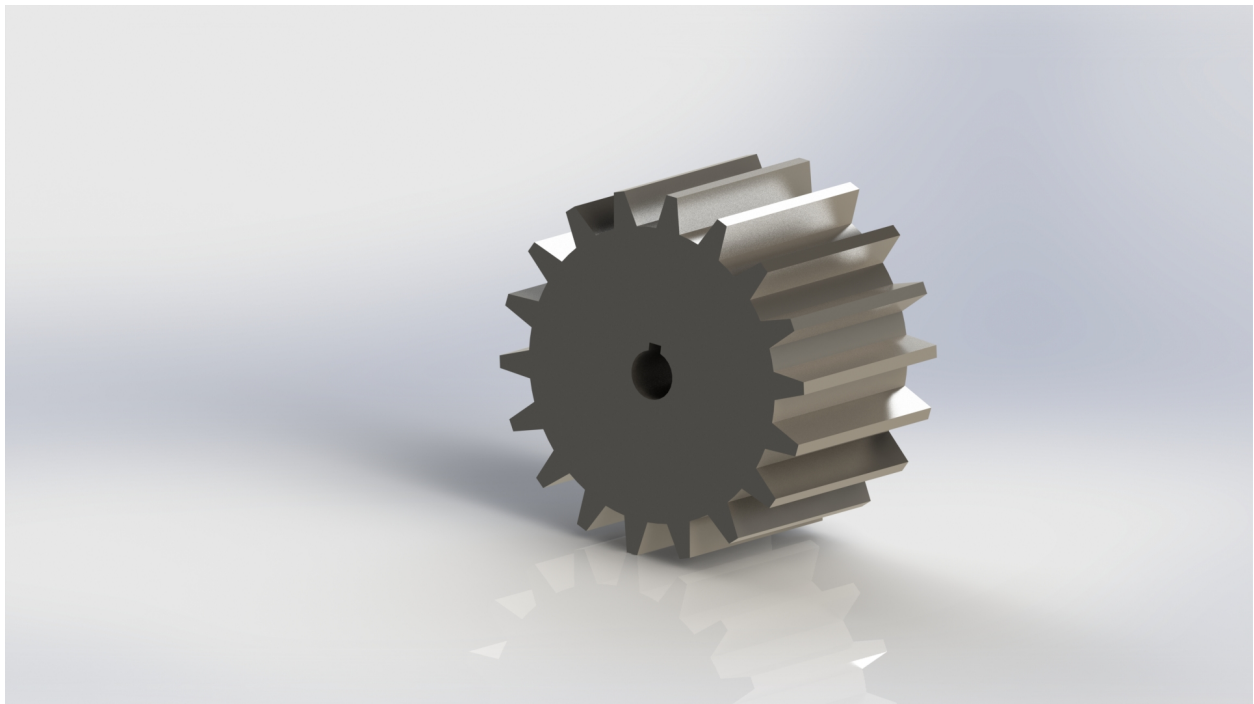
Solidworks Rendering of the Customized Pinion for the Tiller Rotation Mechanism of the Aerial Apparatus
